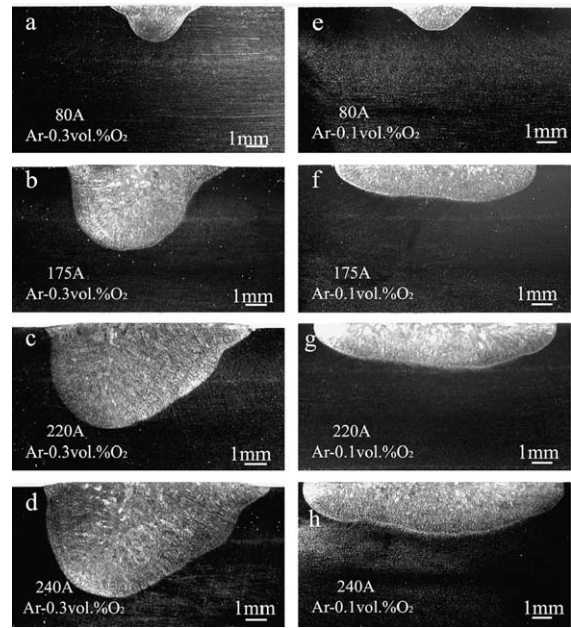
Weld shapes at different welding currents for Ar–0.3vol%O₂ and Ar–0.1vol%O₂ shielding gases.
